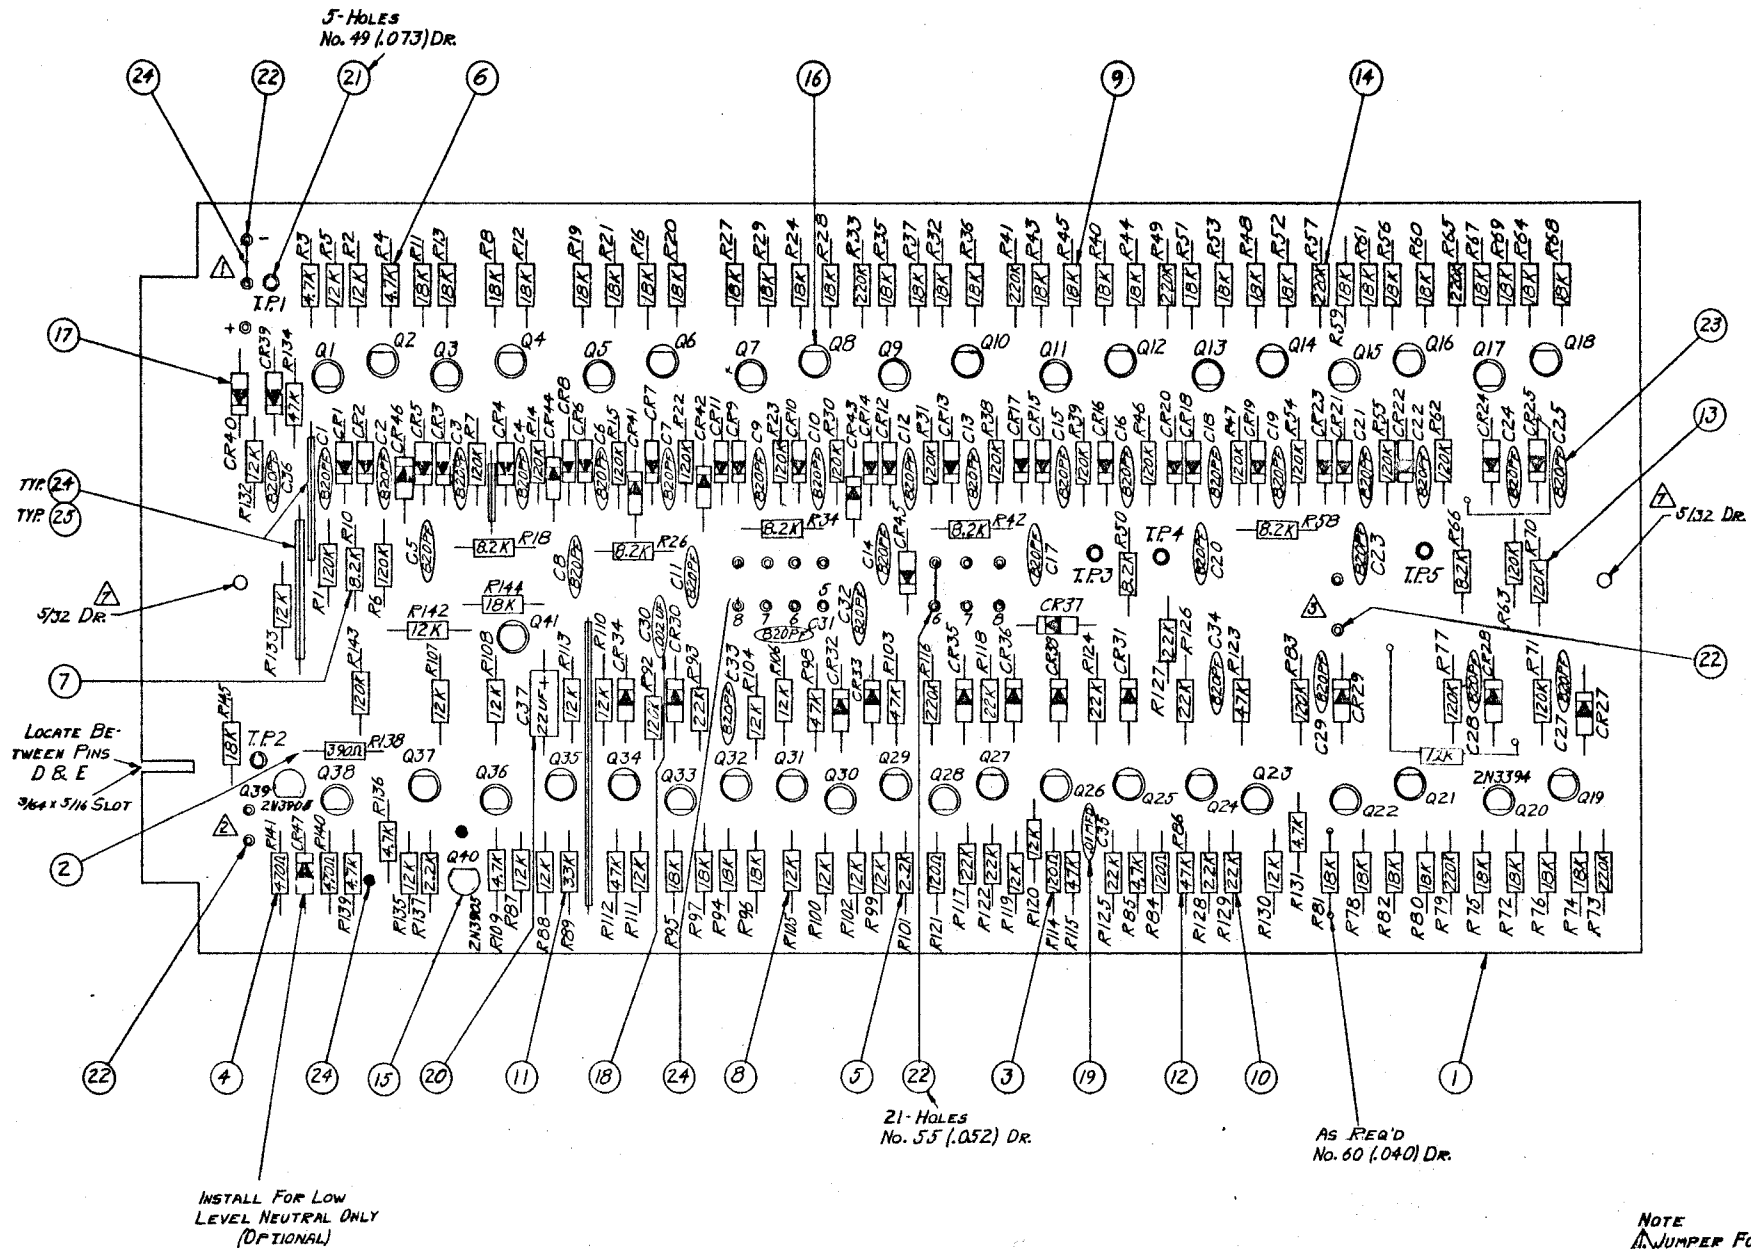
P.C. Board Assembly, Parallel-To-Serial Shift Register (JOB 3182) (D1048A)
